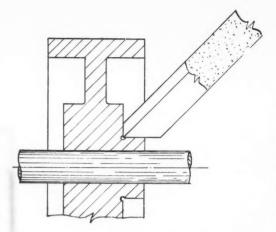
Drawing of a formed wheel designed for grinding work at 45-degree angle.
